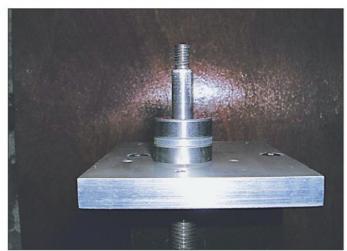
Implementation with thrust plate and cylindrical bearing housing.
